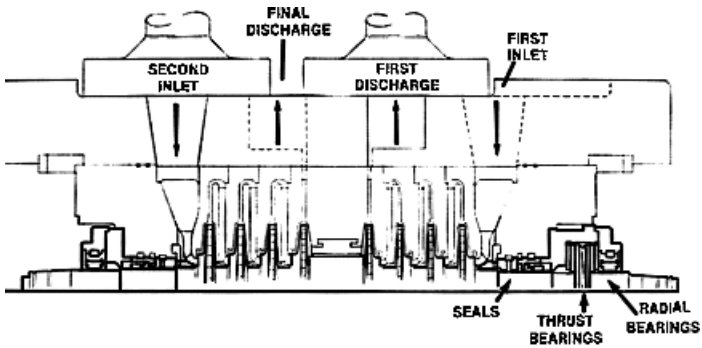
Back-to-back impeller orientation. (*Dresser-Rand Company, Olean, N.Y.*)
